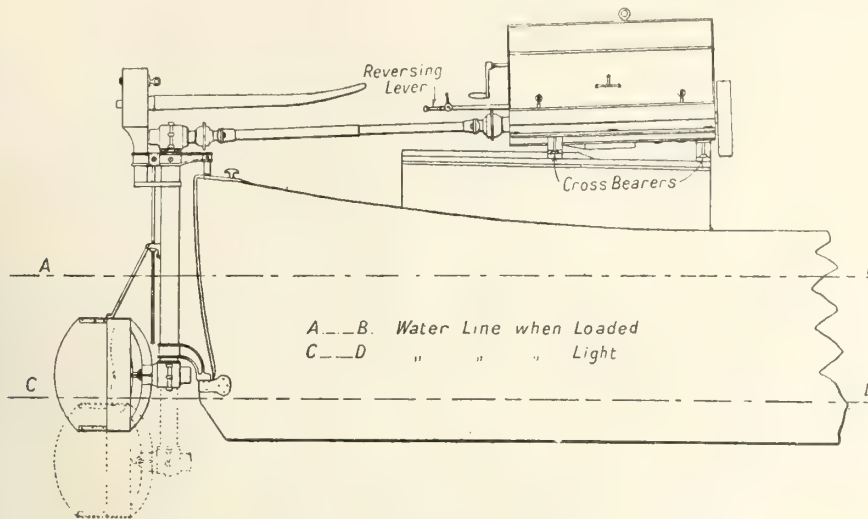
STERN OF BARGE SHOWING DETACHABLE MOTOR INSTALLATION.
